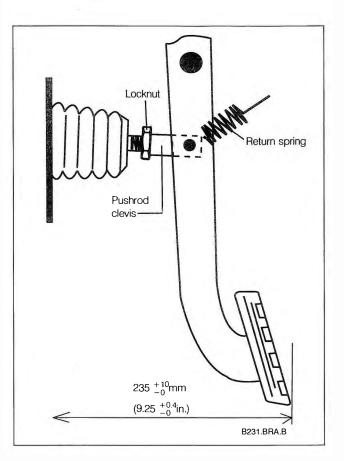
Schematic drawing of brake pedal assembly showing brake pedal freeplay measurement.
